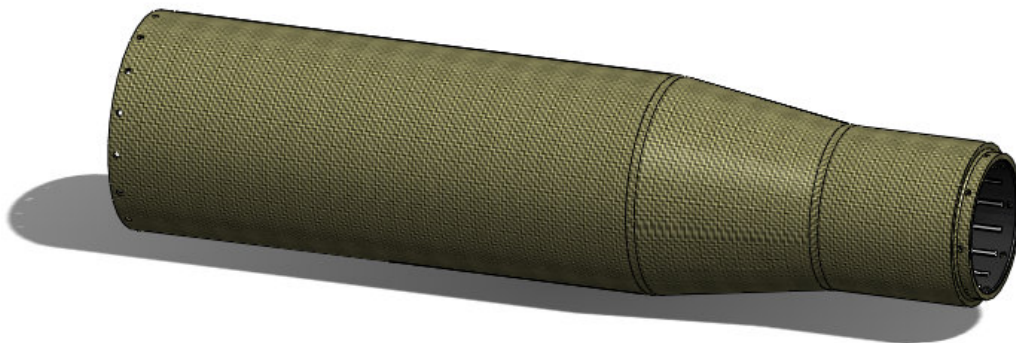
The exterior surface of the bowl is to have a smooth layer added after machining, this should cover the exposed surface of the carbon
